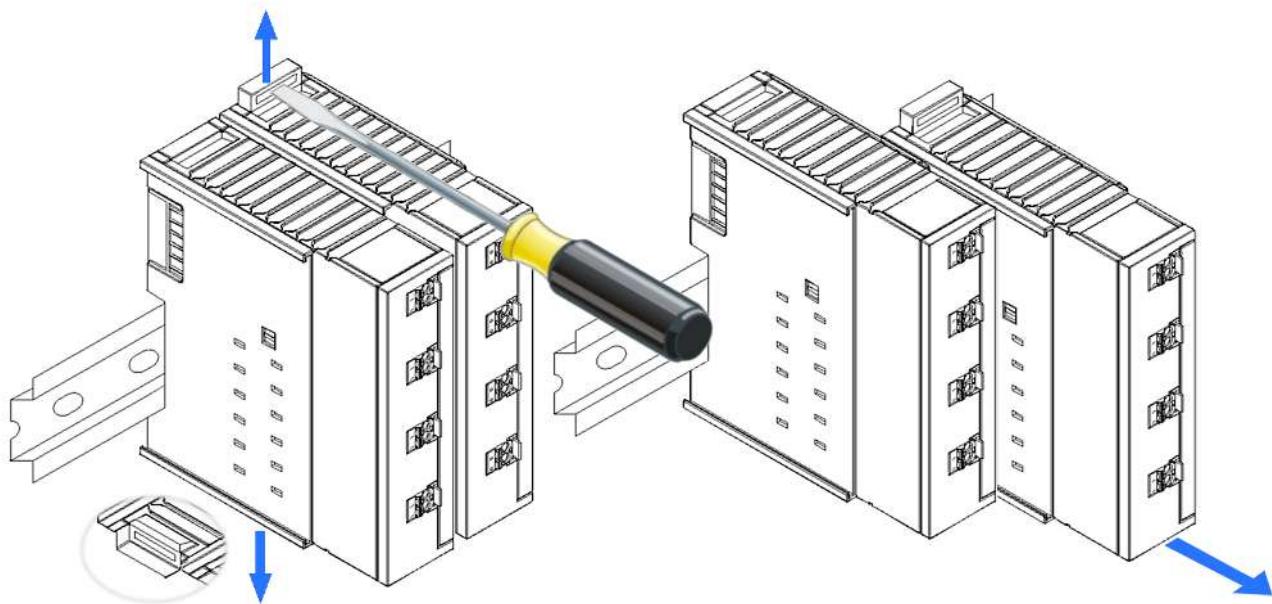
Opening of the upper and lower mounting rail lock and pull out the ELM terminal module
